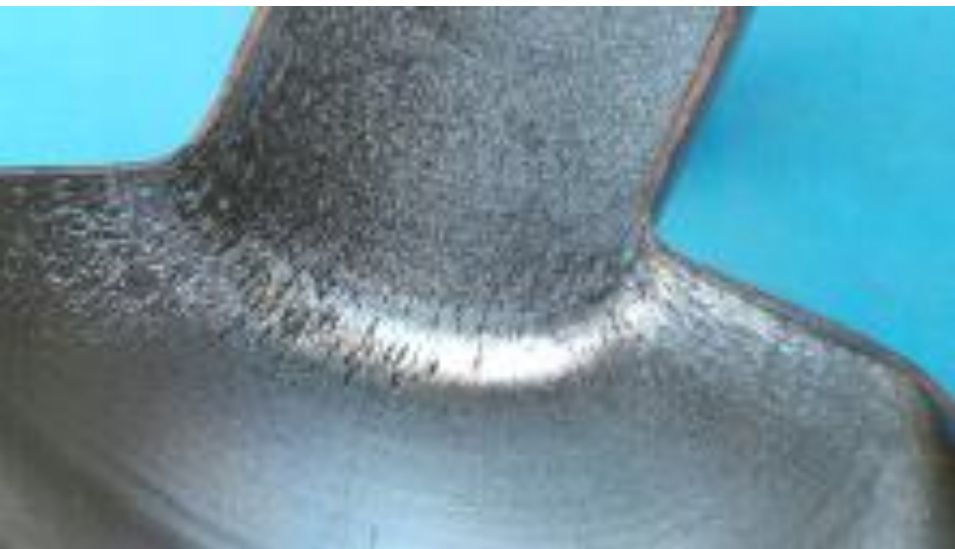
Reverse deep-drawing of seamless tubes. During each redrawing, the external surface of the cup to be drawn becomes the internal of the drawn part.
